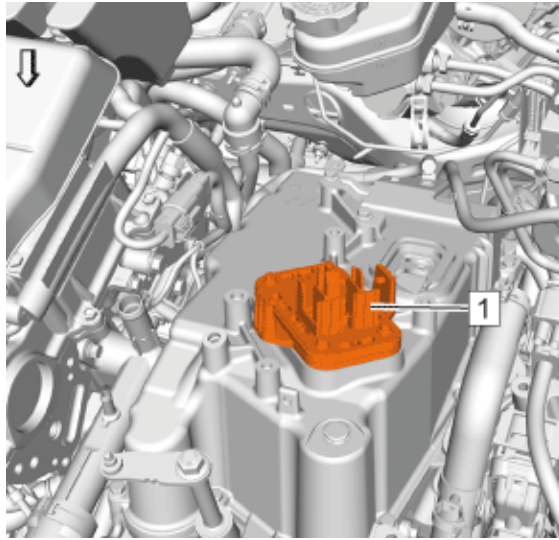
Drive Motor Battery Positive And Negative Cable Connector
